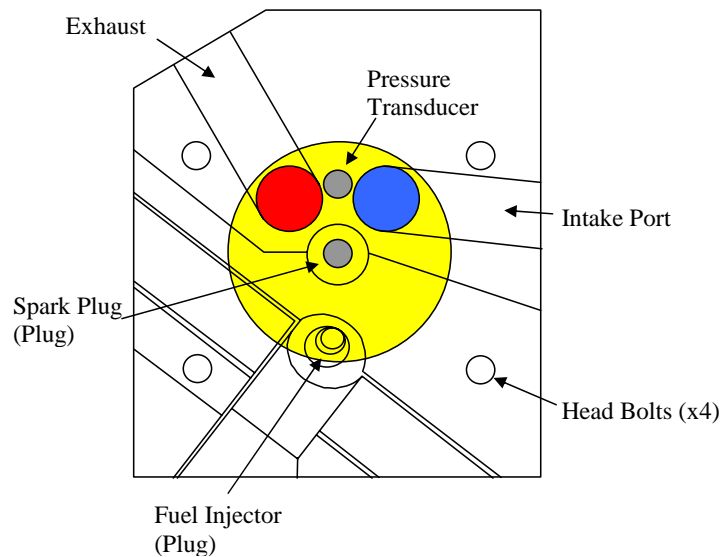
Bottom view of the 2-valve pushrod cylinder head [15].
